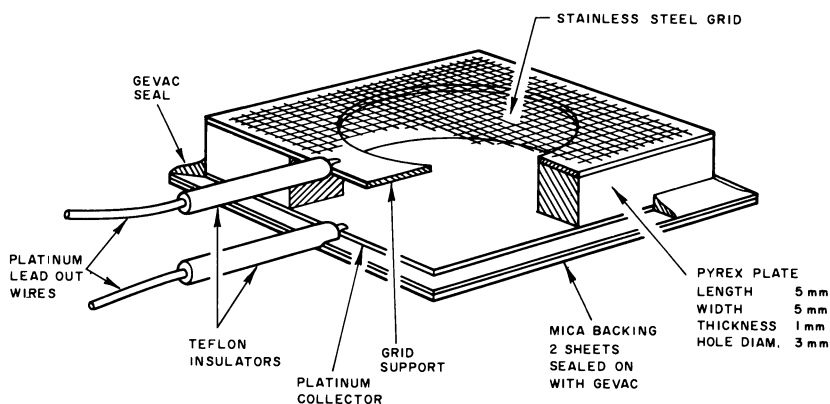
Assembly drawing of the screened probe; double-channel ceramic rod not shown
